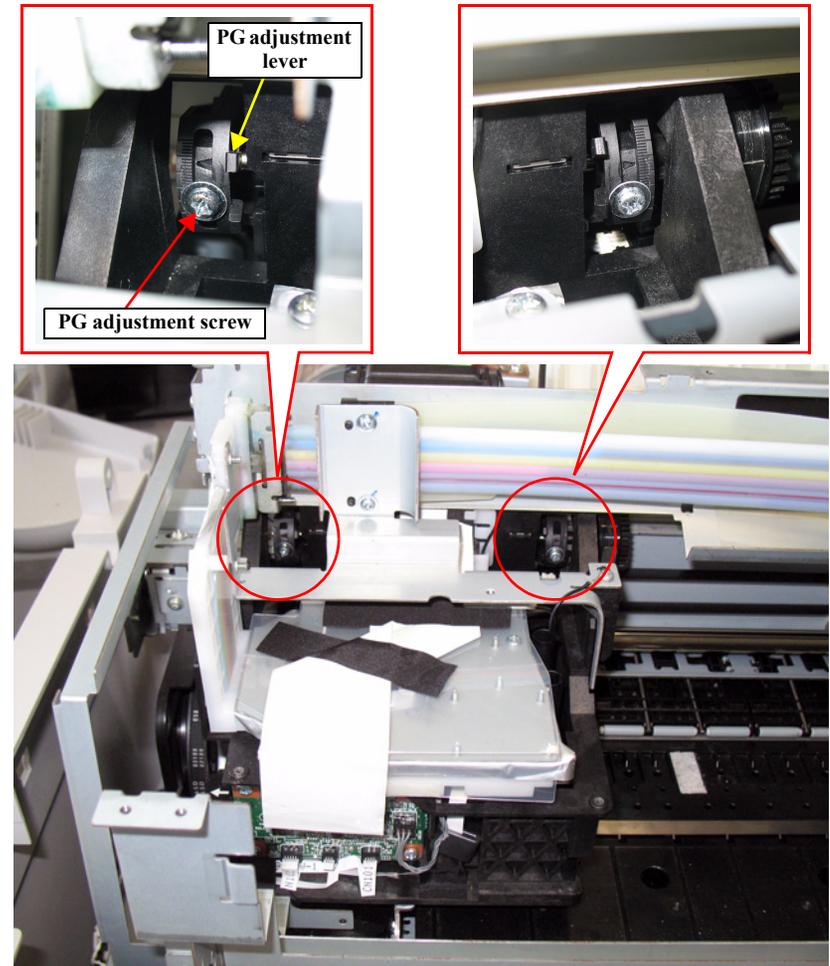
PG Adjustment Levers and PG Adjustment Screws
